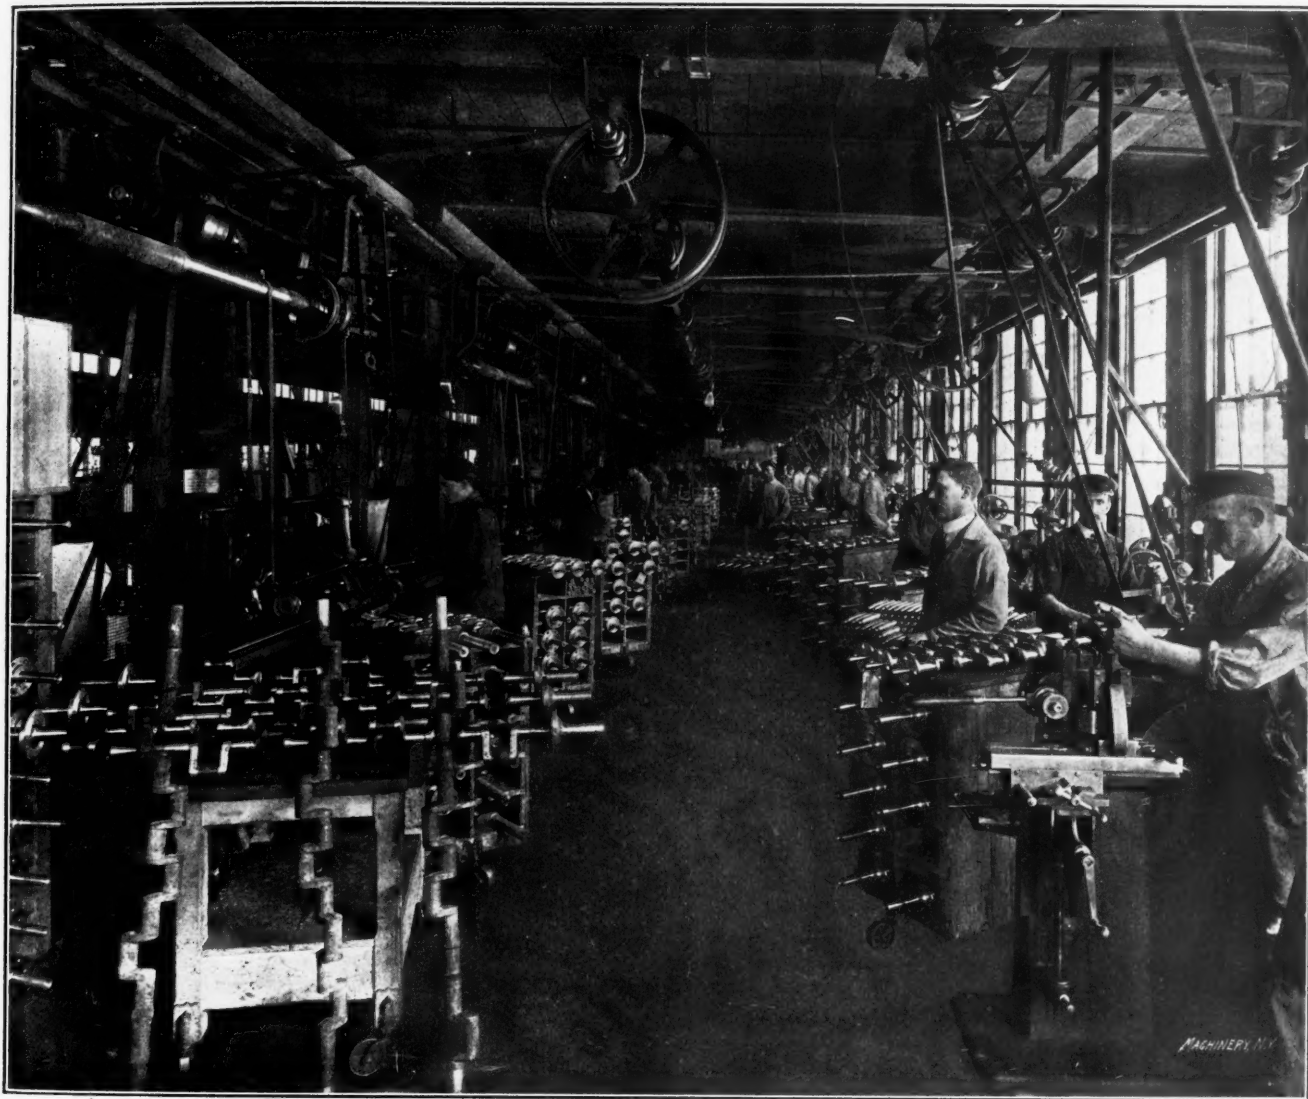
Automobile Crankshaft Grinding Department, Norton Grinding Co.
